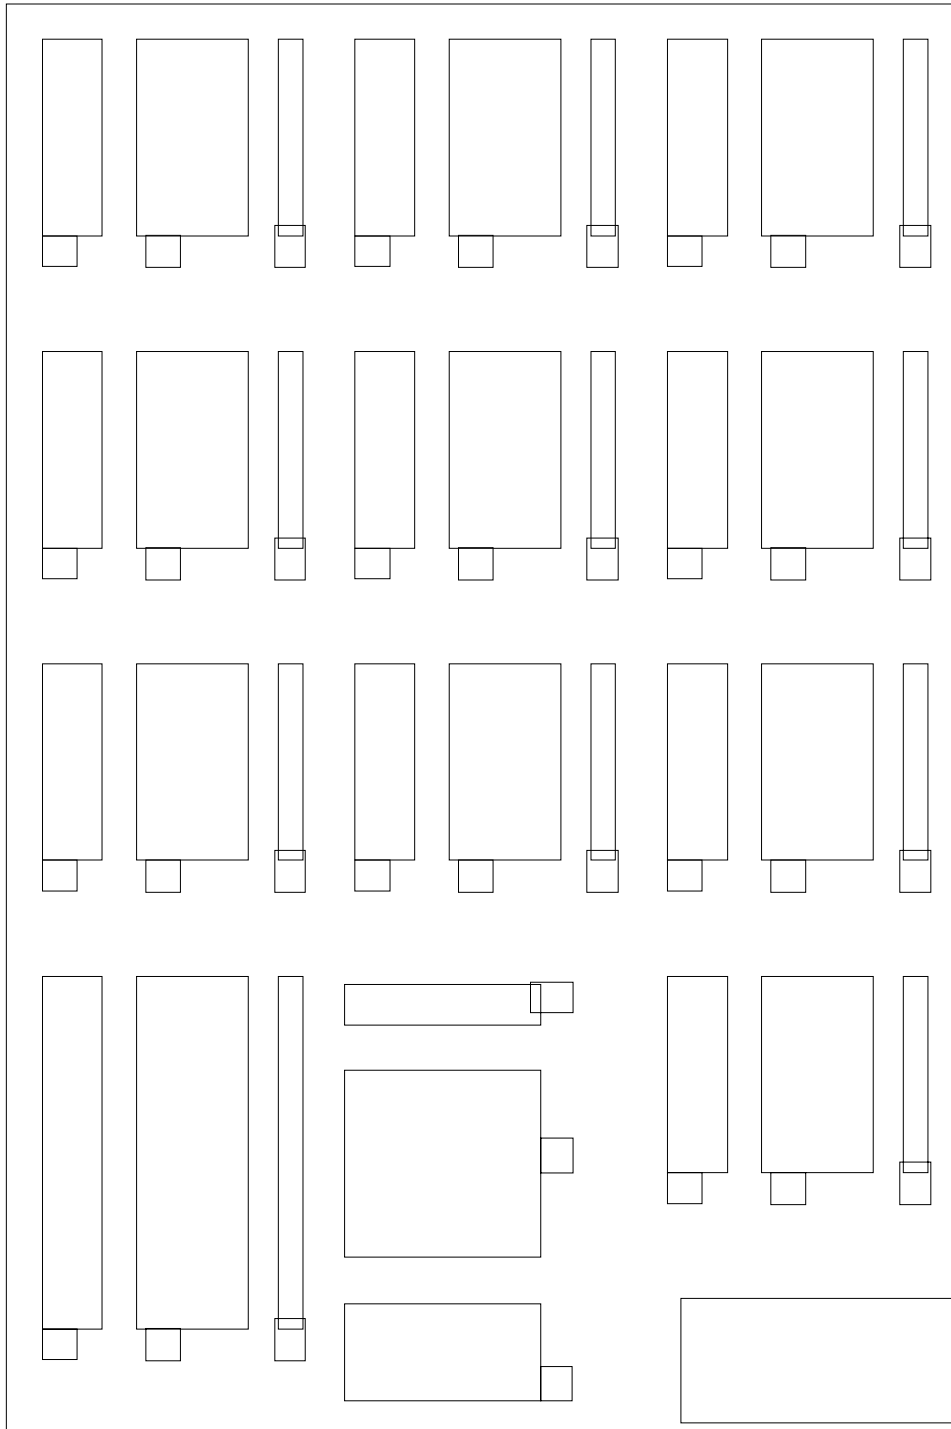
Bottom of the drawing supplied to the manufacturer.
